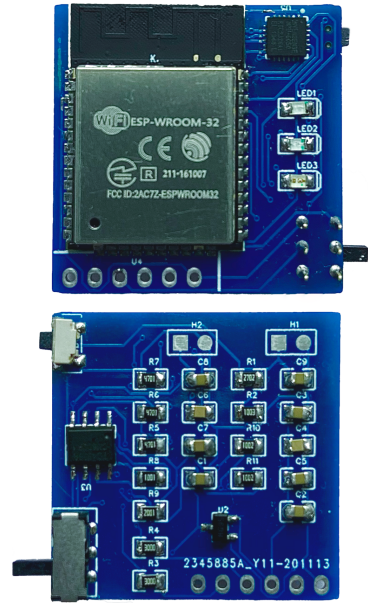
A final PCB assembly with all SMD and THT components soldered on, directly mirroring the PCB design illustrated by Figure 5.14.
